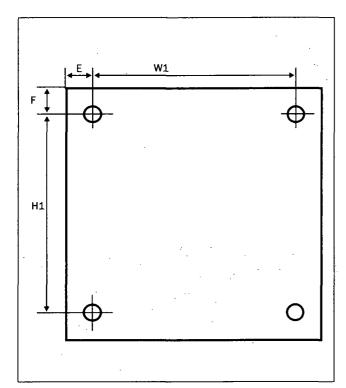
Hole pattern for screw attachment, MSF-310 to MSF-835. Hole distance (mm).
